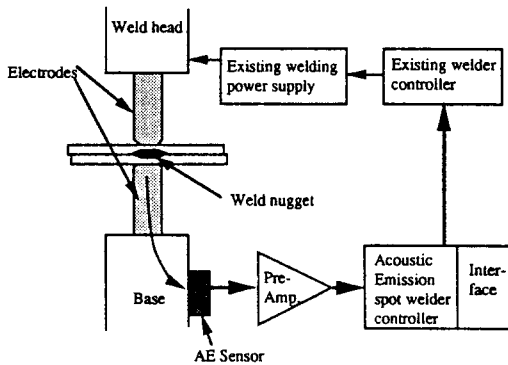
Acoustic emission feedback control of the spot welding process. (ref. 6)
